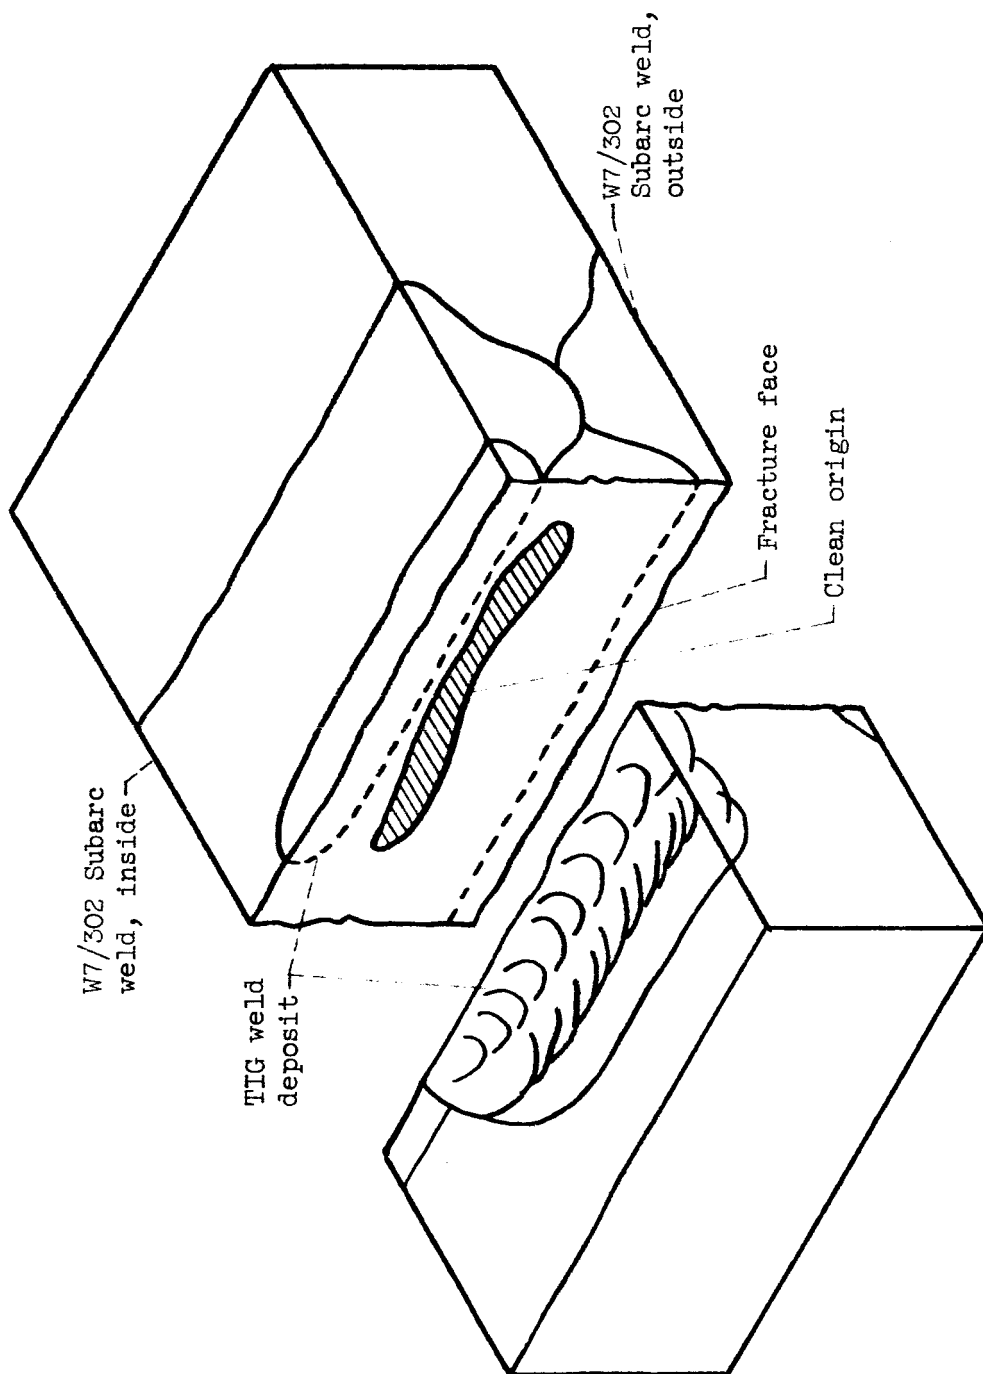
Isometric drawing showing relation of clean origin to weld deposits.
